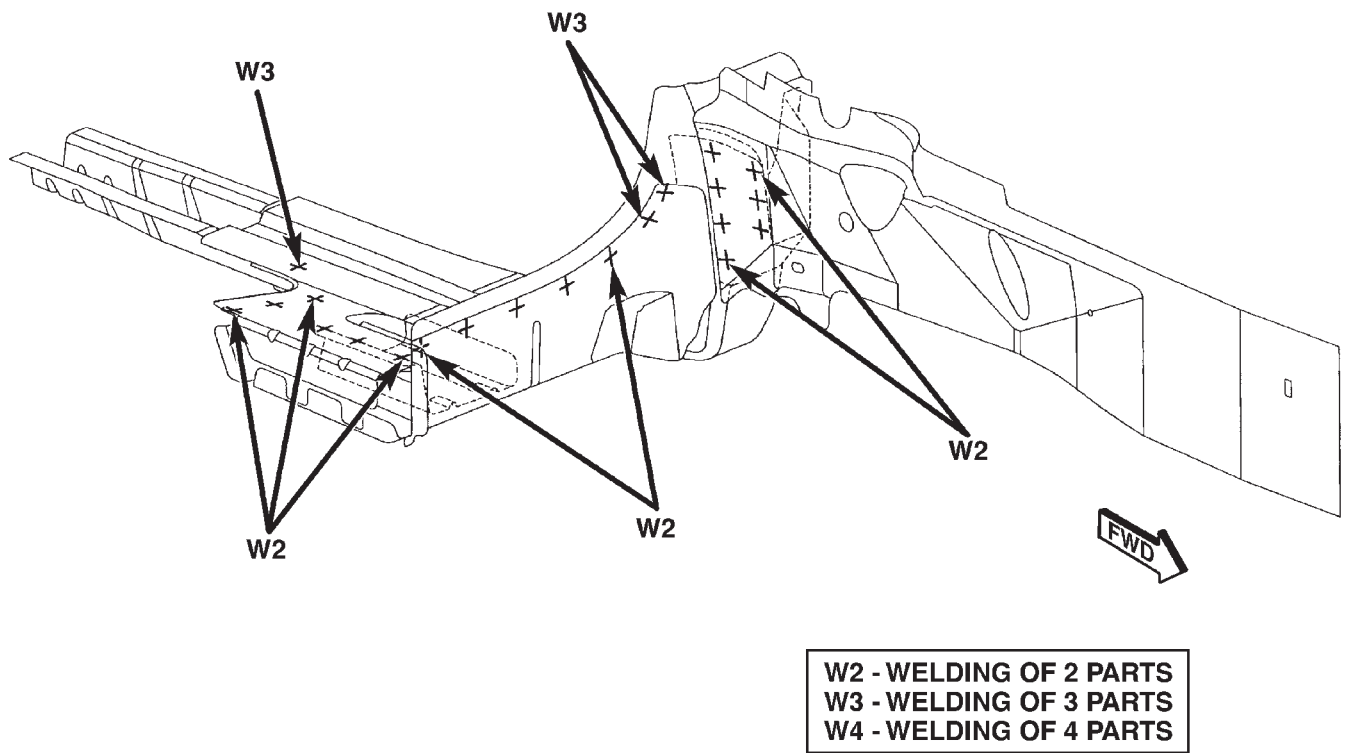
FRONT ENGINE MOUNT SUPPORTS & RADIATOR BRACKET SUPPORT TO LOWER RADIATOR CROSSMEMBER
